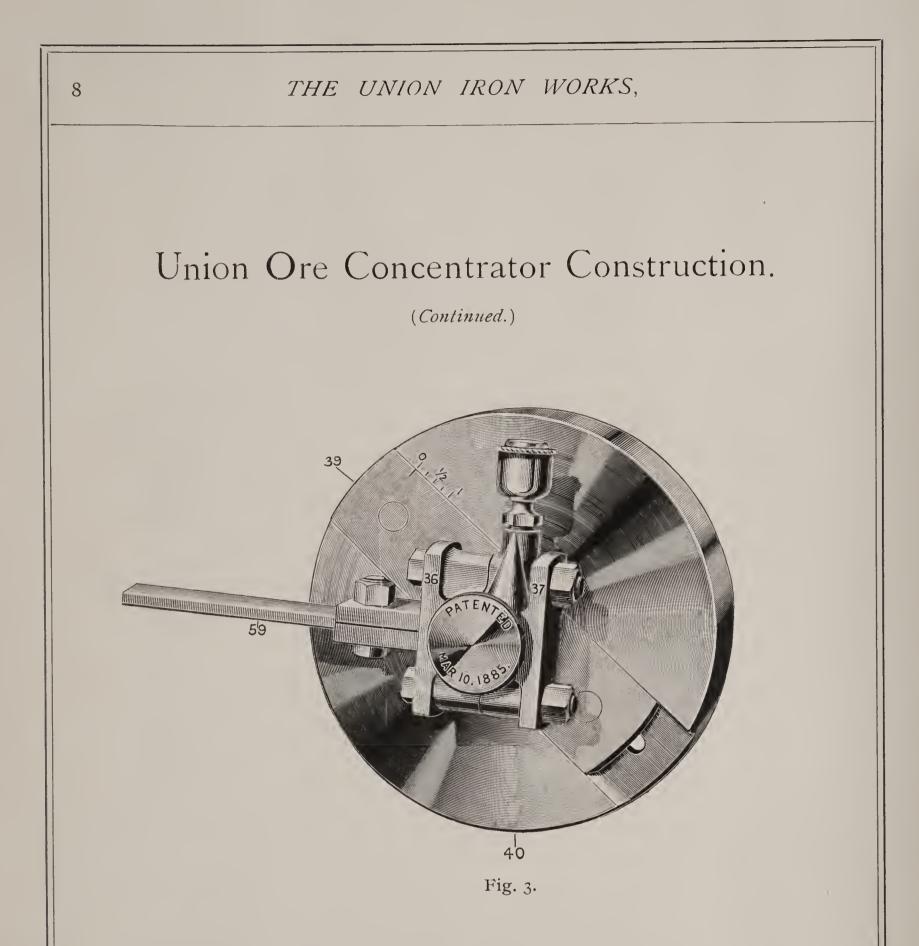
illustrates the adjustable crank, which imparts motion to the shaking frame or table. The disc, 40, is keyed to the driving shaft, in the face of which is a slot. In this slot the sliding crank pin, 39, is secured, by means of two bolts or studs, passing throughout the disk. By moving this sliding crank pin in or out from the center, the shaking frame can be given any throw or travel desired. This
